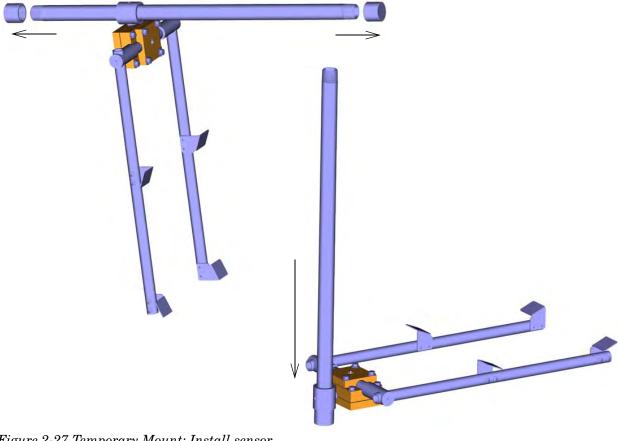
Temporary Mount: Install sensor carrier/knuckle onto 24" pipe
